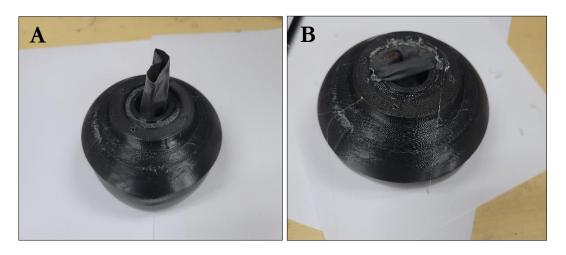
GJG development: A. Balloon end cut, B: Balloon end rolled and partially glued; One can use skin friction (rolling pointer finger and thumb) to assemble the gripper transitioning from A to B.
